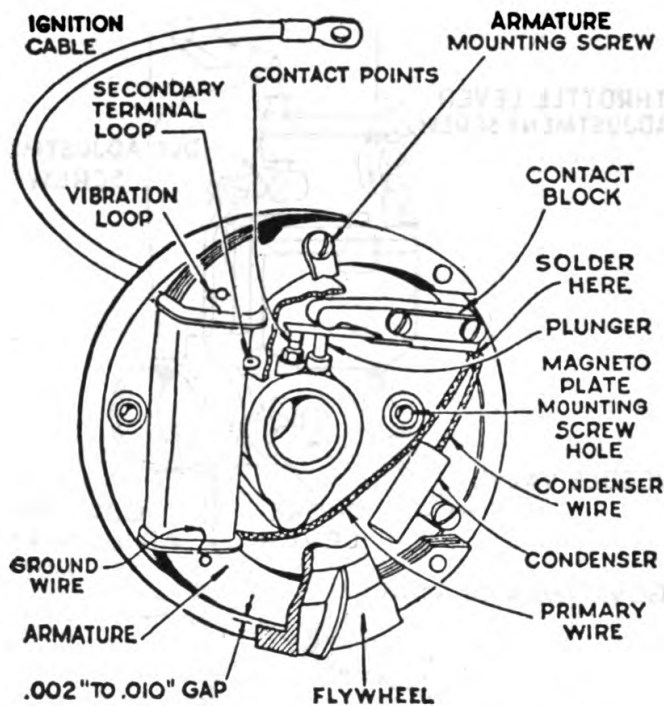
COMPLETE MAGNETO ASSEMBLY
